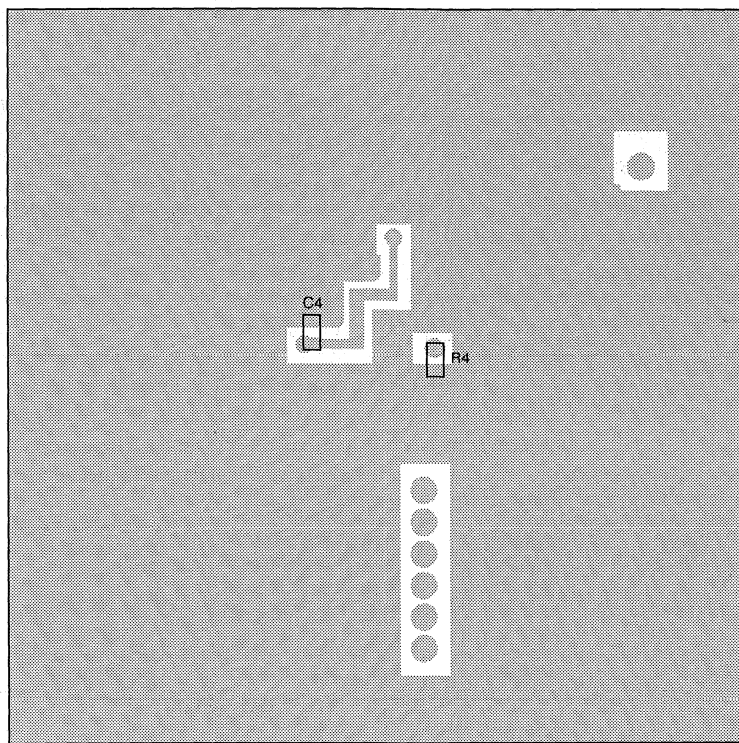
PCB top view with components for TQFP32; test circuit Fig.6.
